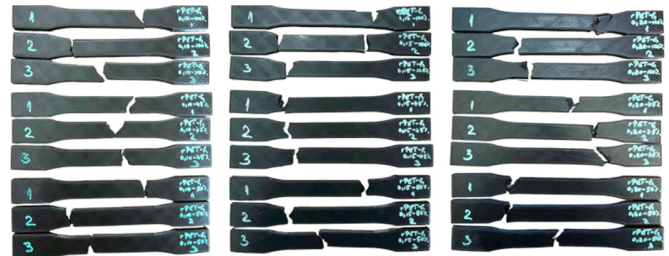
Tensile specimens additively manufactured from rPETG and heat-treated after tensile testing on the Barrus White 20 kN machine.
